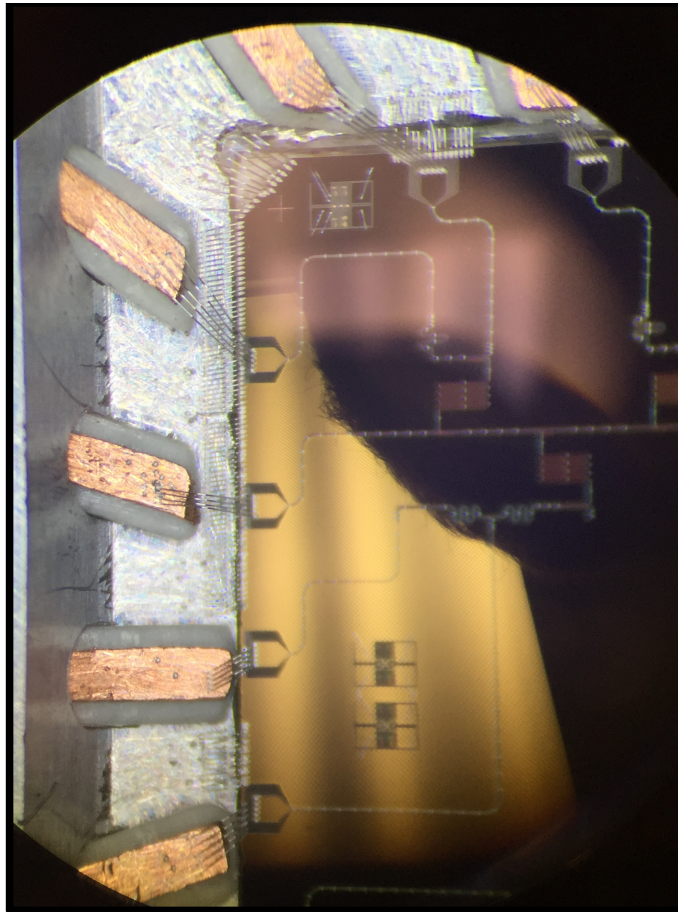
Demonstration using nice new wire bonder in an old-style package. With a nice wire bonder we were able to place grounding wires continuously in front of the copper PCB insert that had been cut too short.
